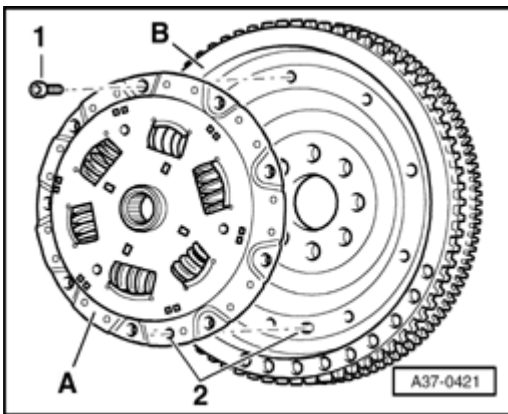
Removing Bolts And Disconnecting Damper Unit From Flywheel
